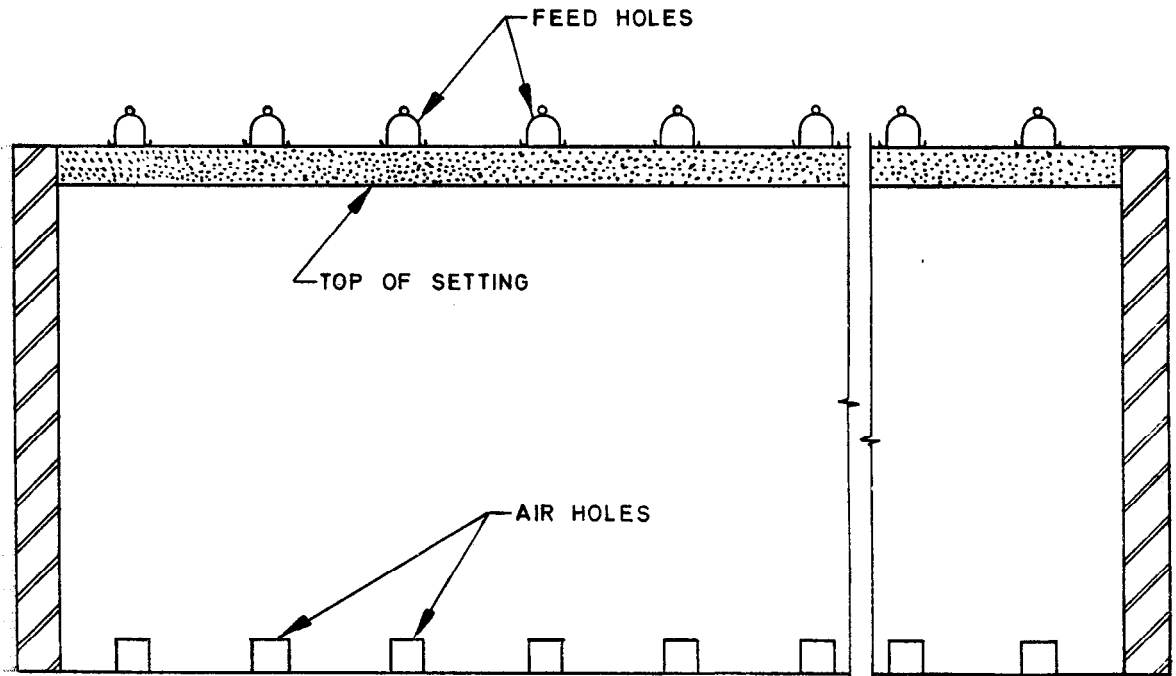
LAYOUT OF AIR HOLES IN BRICK KILN
